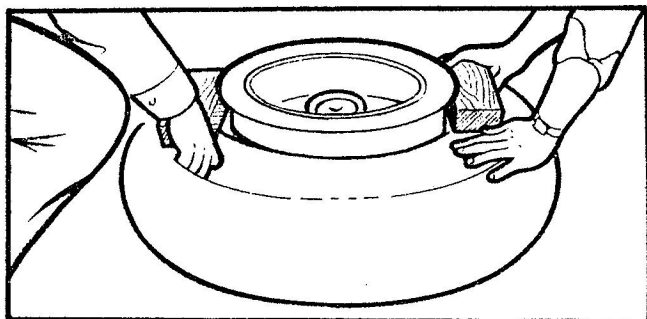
Using Wooden Blocks to Force Tire Bead into Well
